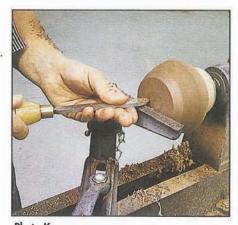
Photo K After shaping the box and lid to final dimensions, move the tool rest, then turn the top of the lid.
